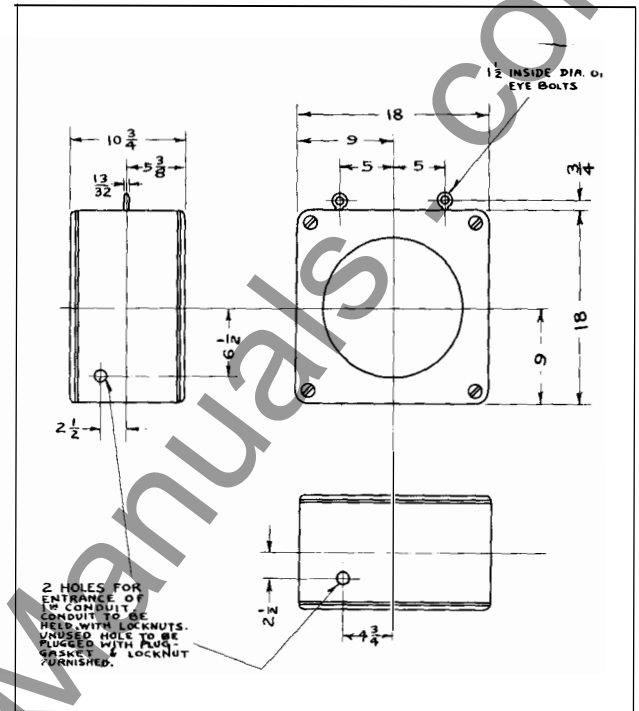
Type HB Boiler Room Indicator, 15" Dial.
